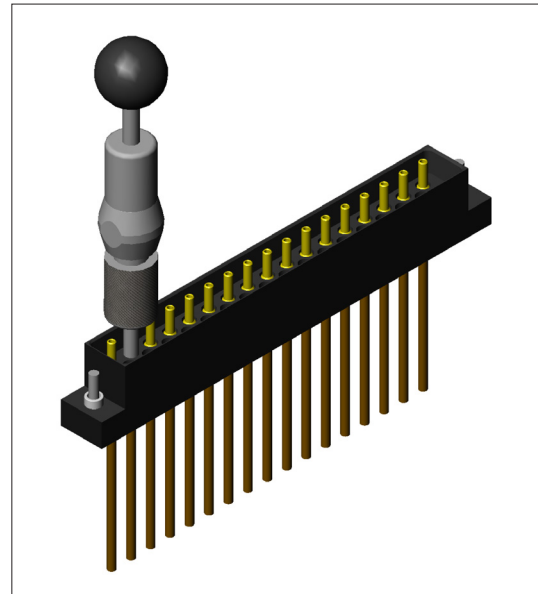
Figure A. Ensure that the tool is kept perpendicular to the module face to avoid damage to the contact or tool.
